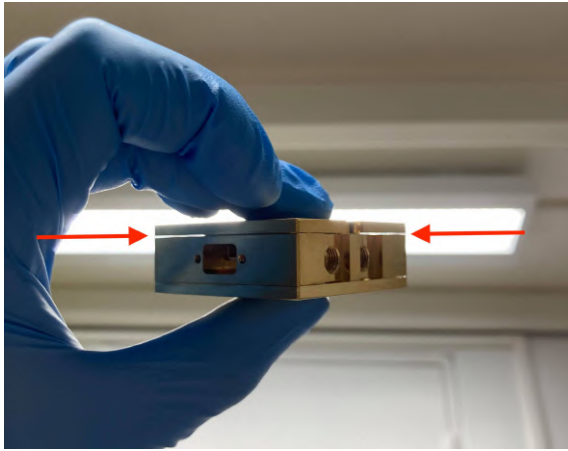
JAWS gap. Box closed with PCB inside: the gap between the top part and the ring is a signature of the contact between the top part and the PCB.
